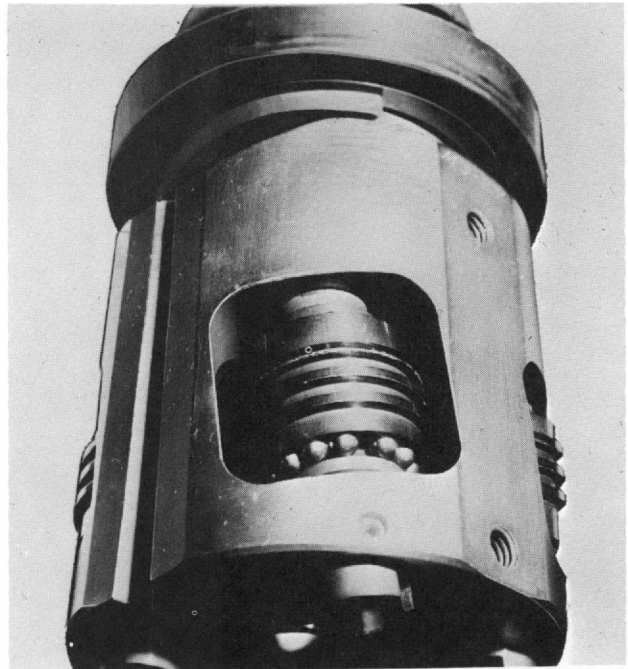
View of Mechanism Rotor Assembly Showing Chipping of Roller Lands.
